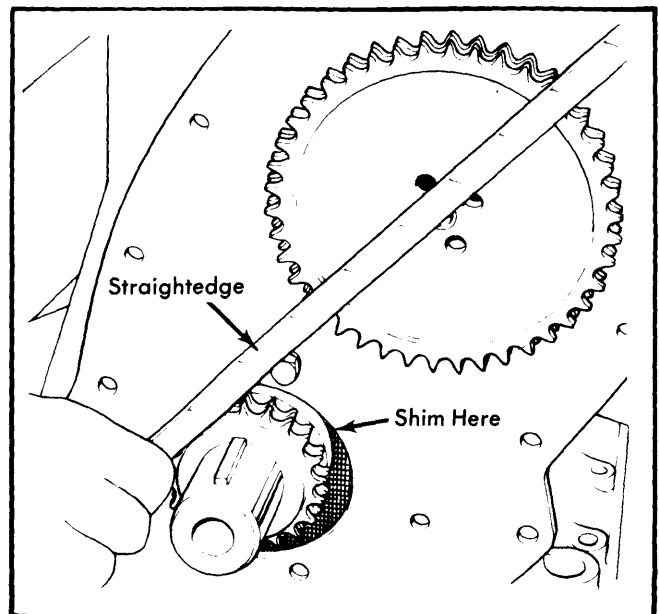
Measuring Camshaft and Crankshaft Alignment
